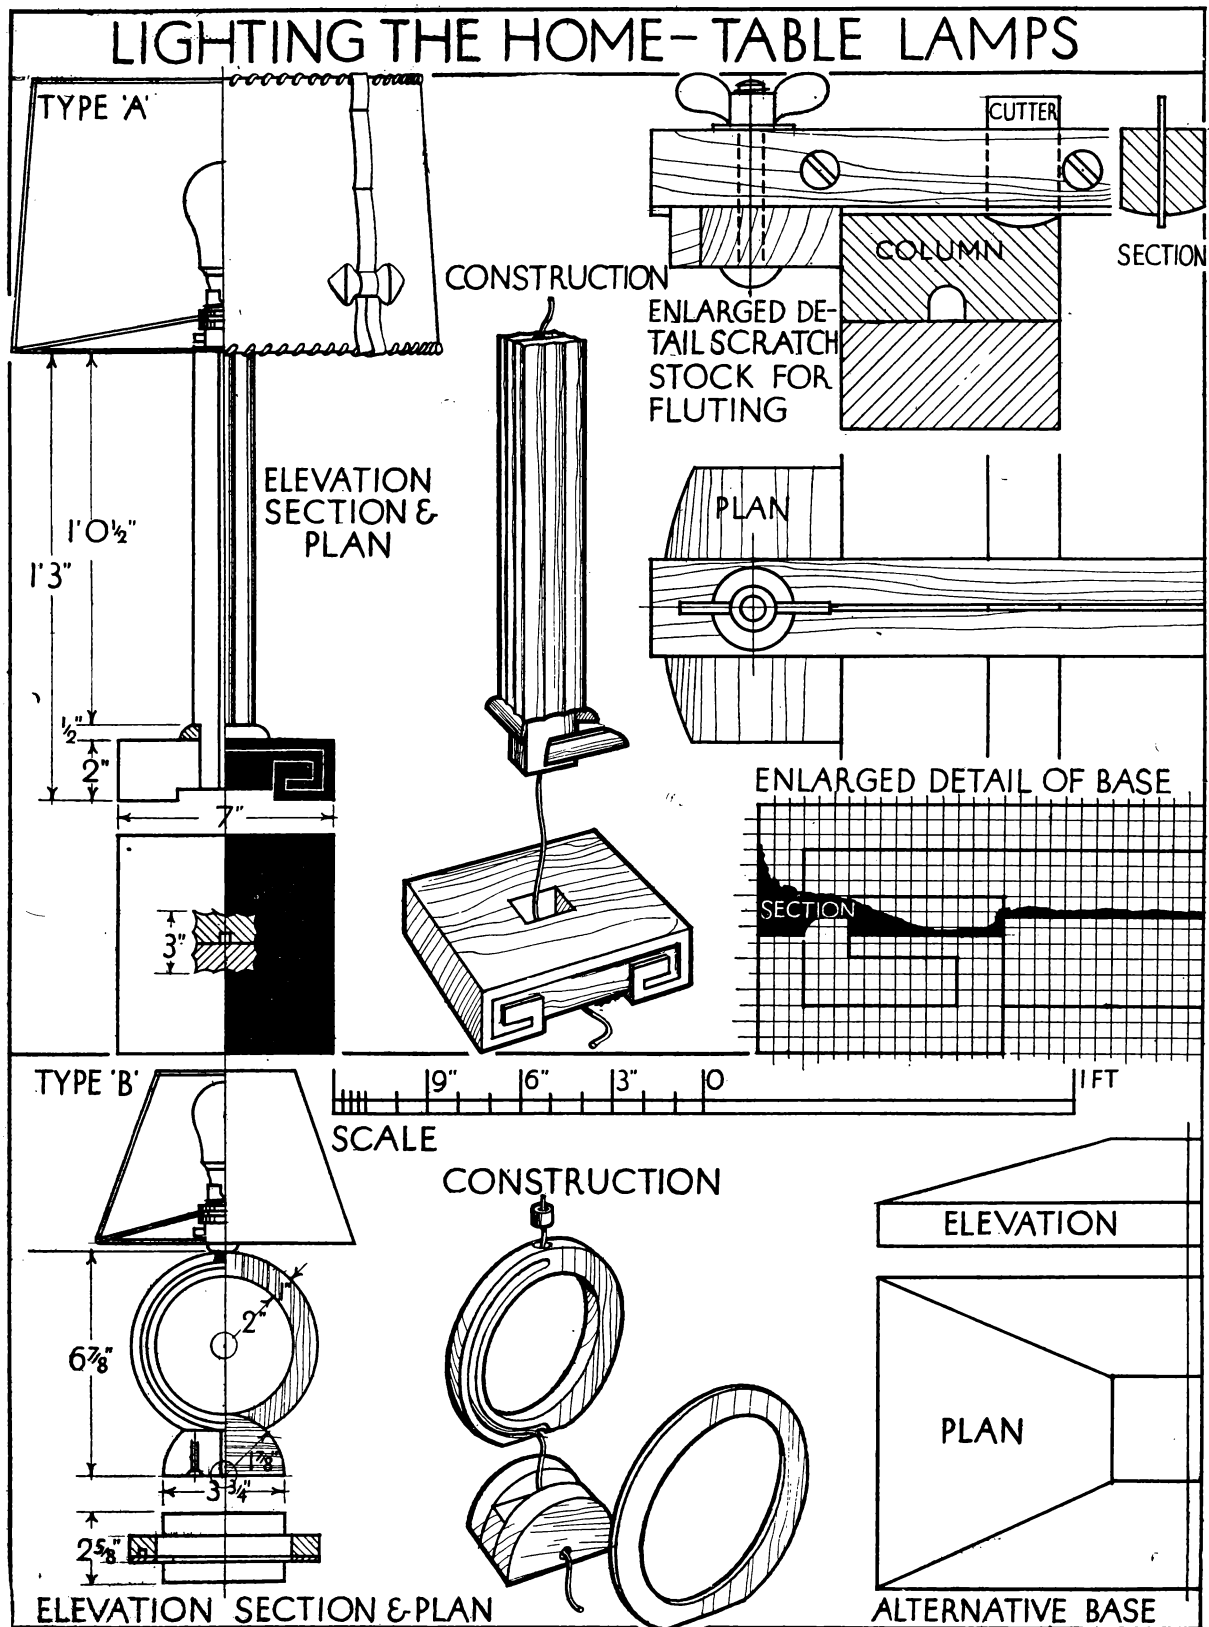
SCALE ELEVATIONS WITH MAIN SIZES, AND DETAILS OF CONSTRUCTION.
